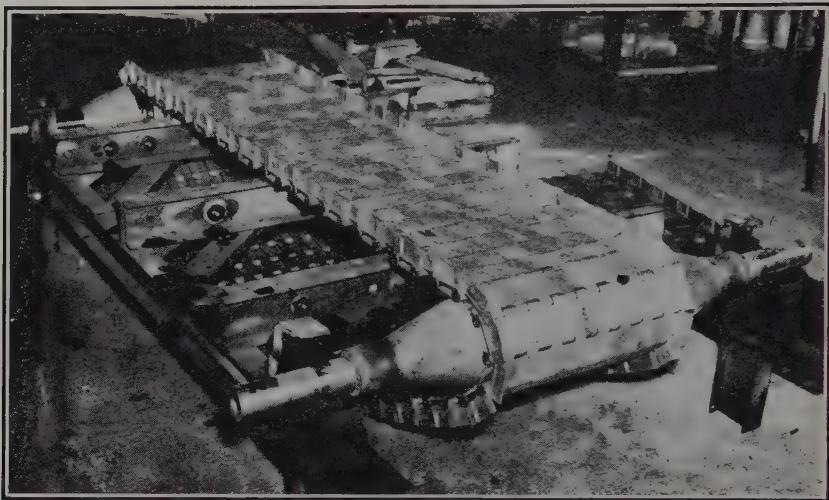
Assembly of link belt for furnace. Courtesy of Electro-Alloys Division, A. B. S. Co.
